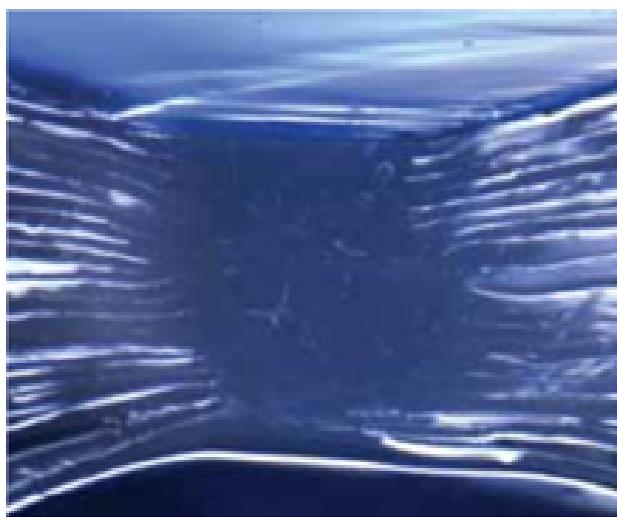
Outline of weld volume, 22 layers of 0.1 mm thick virgin LDPE.
